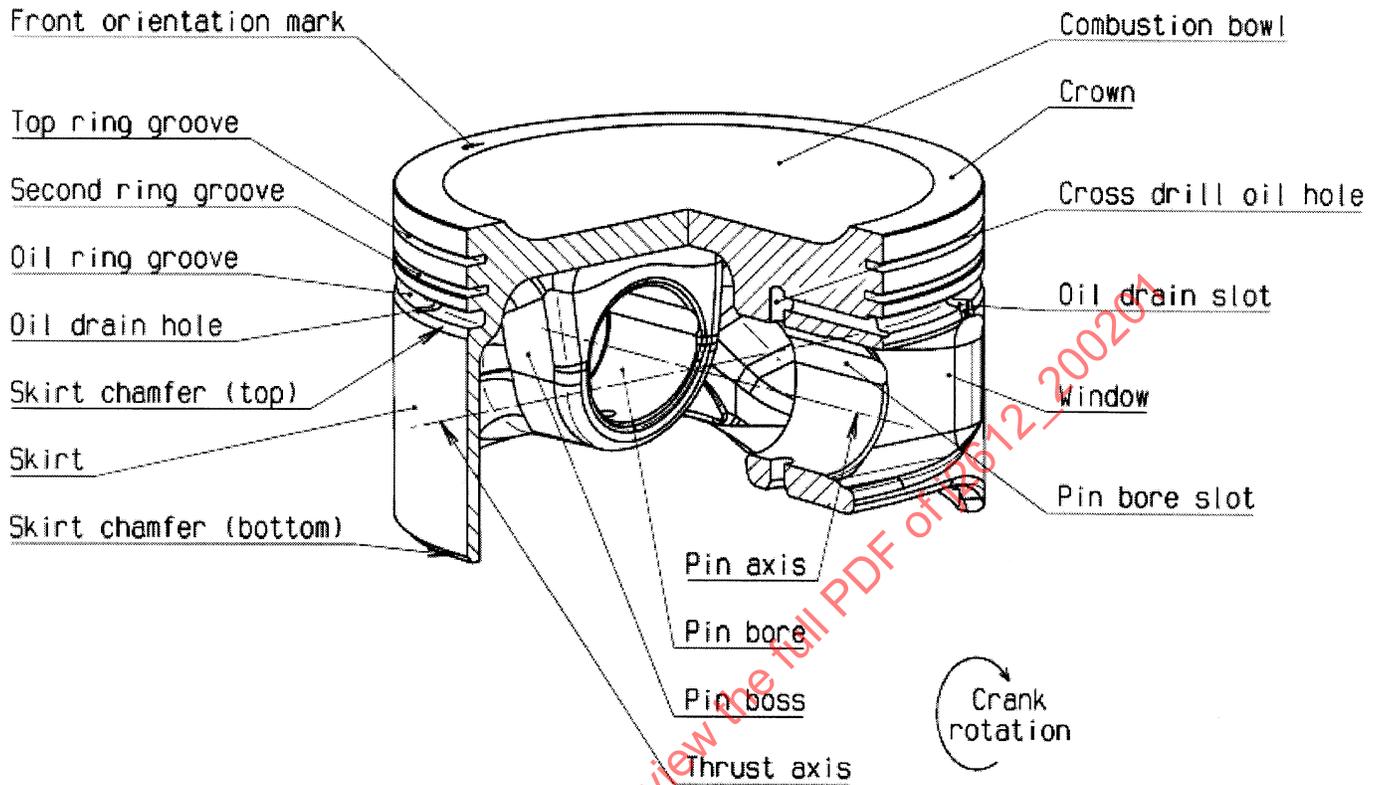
LIGHT DUTY MONOBLOCK PISTON — ISOMETRIC VIEW
